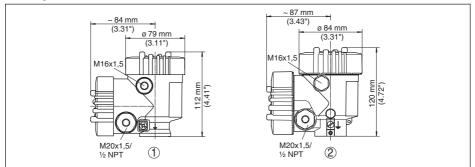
Dimensions housing (with integrated display and adjustment module the housing is 9 mm/0.35 in higher, with metal housings 18 mm/0.71 in)
